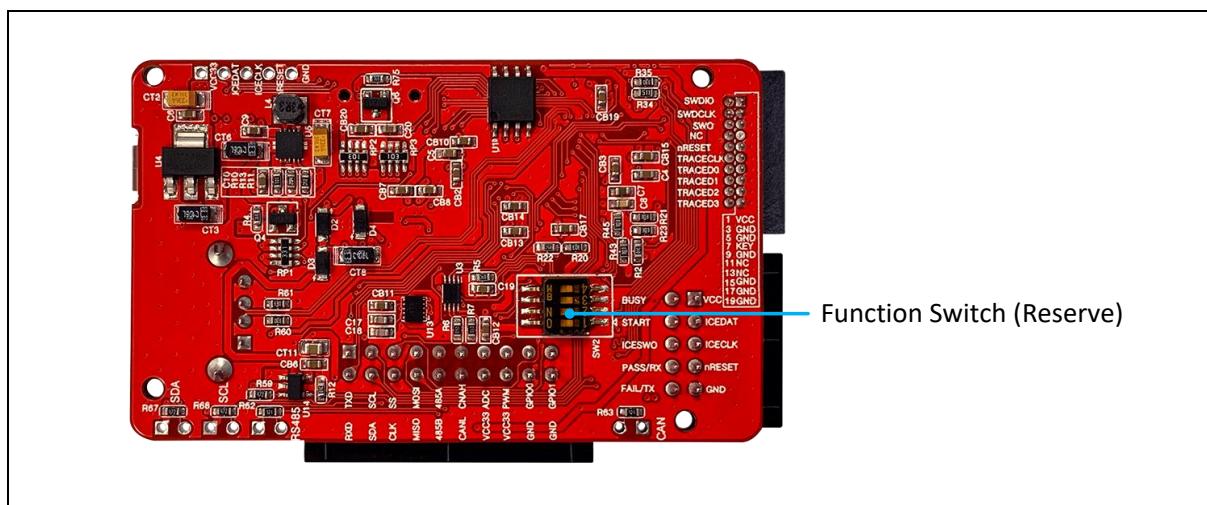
Rear View of Nu-Link2-Pro PCBA
